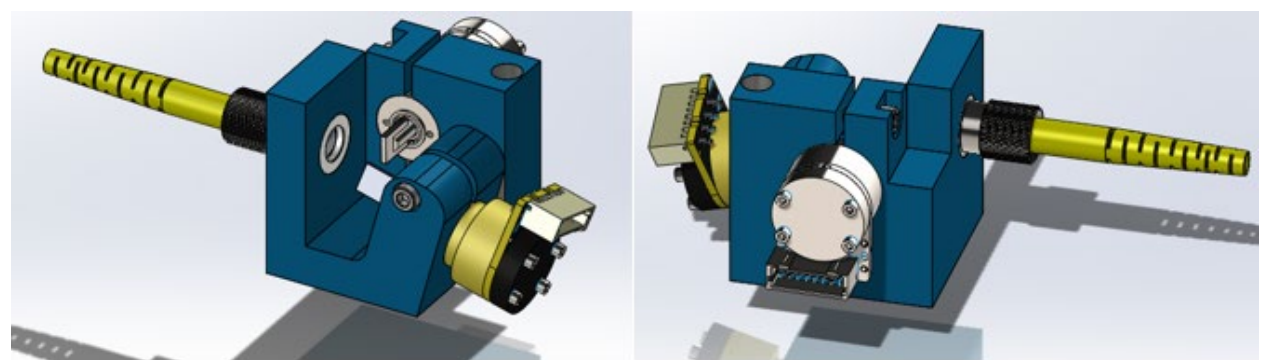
SolidWorks Rendering of Laser, Collimator, and Galvanometer assembly (front and back)
